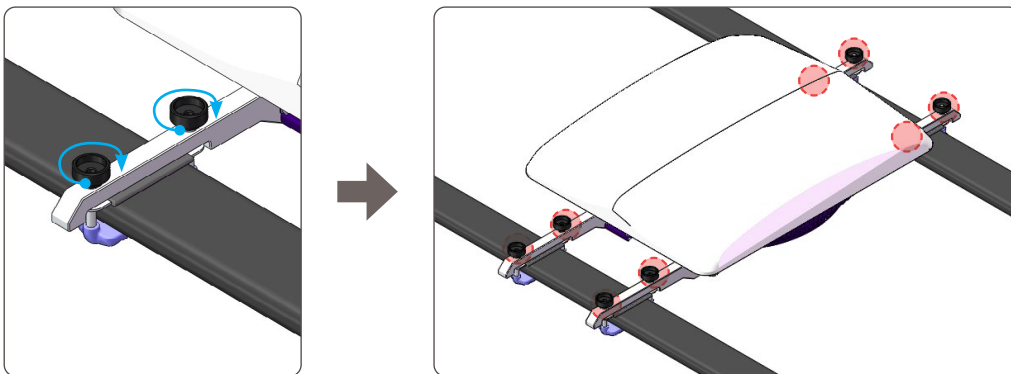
Fixing the Land Mobile Mount Adapter on the Cross Bar
